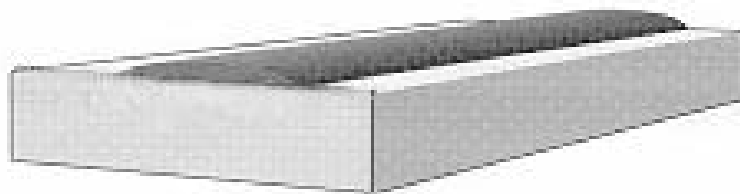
Laser Engraving Applied Directly To A Surface
